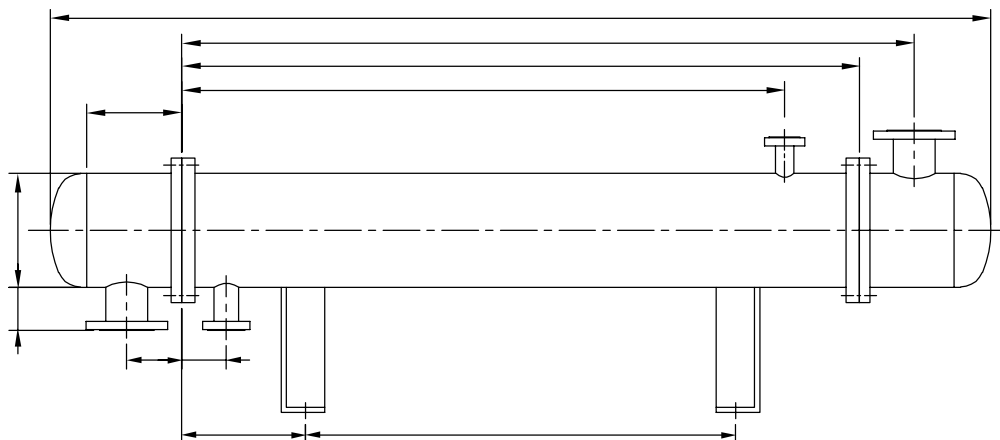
Important dimensions of a fixed tubesheet heat exchanger.
